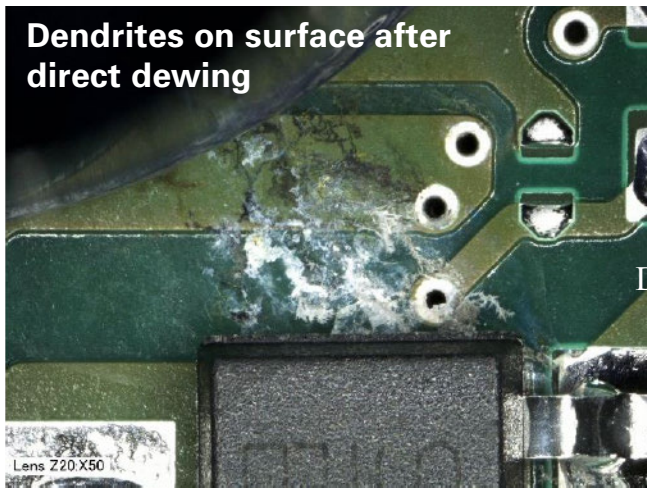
Failure mode on a PCB. (Source: Bosch)
